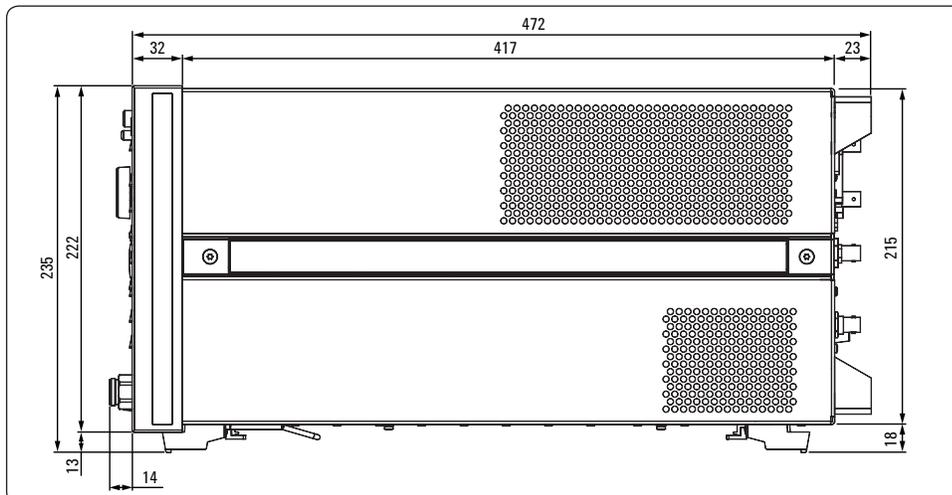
Dimensions (side view, E5071C with Option 2D5/2K5/4D5/4K5, in millimeters)
